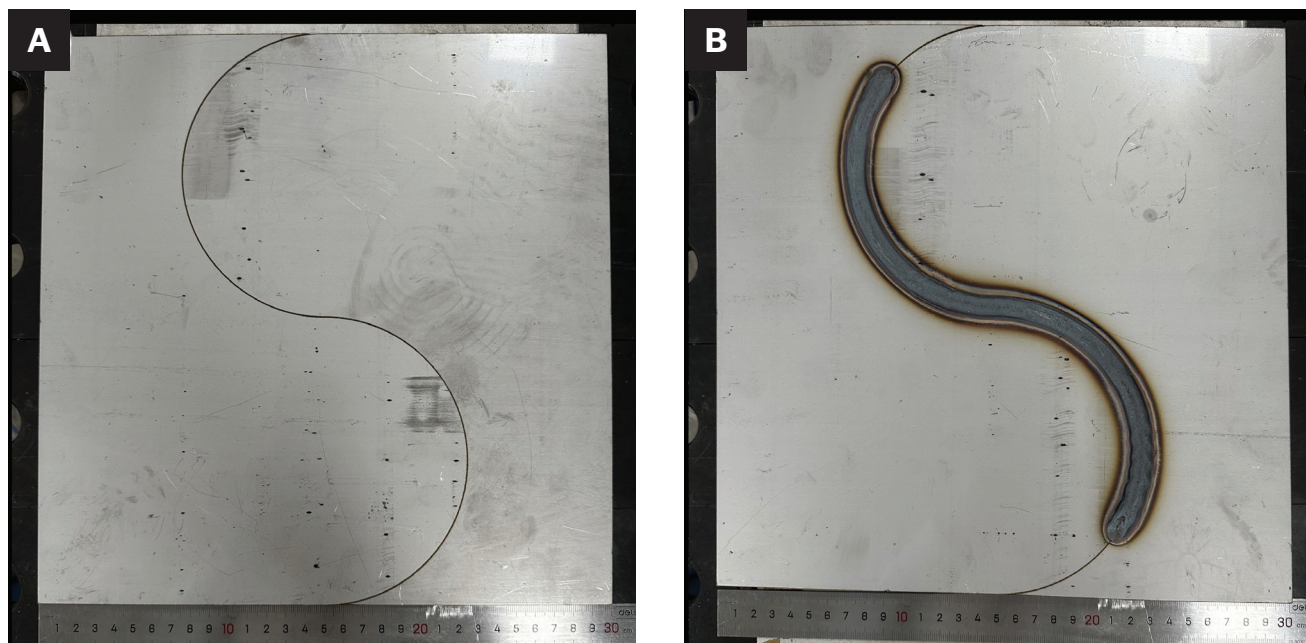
Experimental base metal and S-shaped weld seam tracking result: A — Base metal of S-shaped weld seam; B — weld seam tracking result of S-shaped seam base metal.
